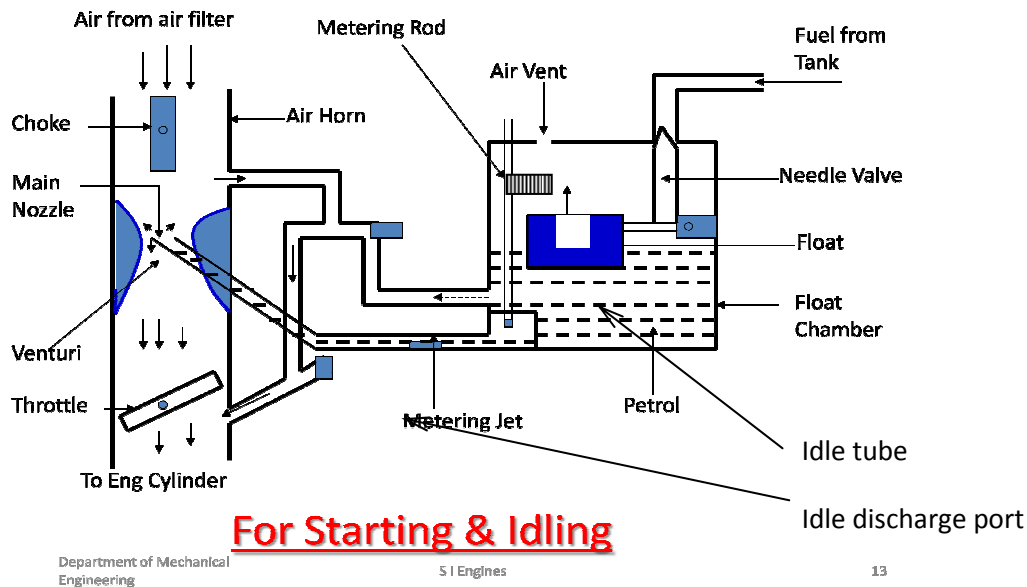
Modified Simple Carburettor (Modern Carburettor)
